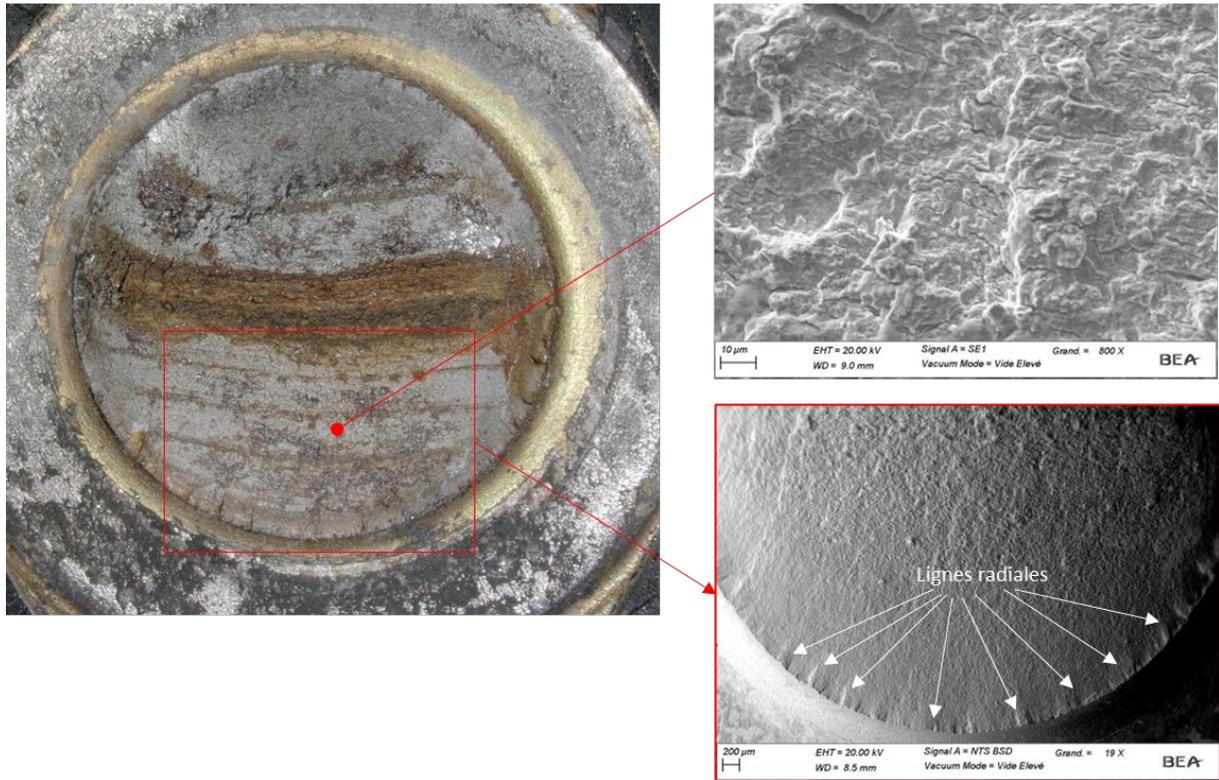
SEM view of fracture surface of screw in rear top position (source: BEA)
